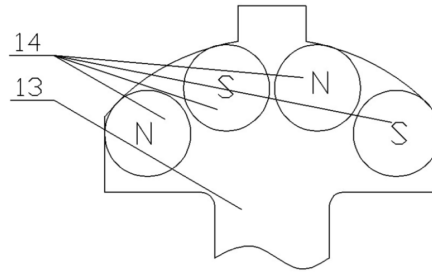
Arrangement of steering knuckle electromagnetic guide block
